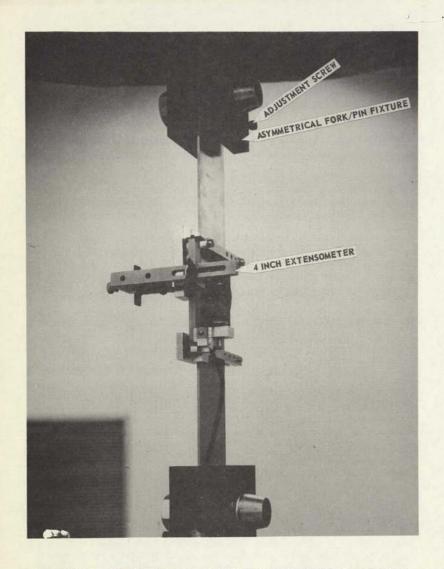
ARRANGEMENT OF JOINT PULLING FIXTURE, LAP JOINT SPECIMEN, AND EXTENSOMETER FOR DETERMINING THE JOINT STRENGTH OF 6.350mm (0.250 in.), 7.937mm (0.3125 in.) AND 9.525mm (0.375 in.) FASTENERS
